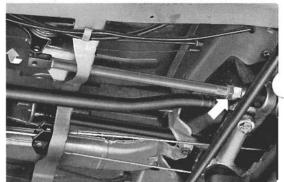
Correct pushrod length. Dimension a must be 106 mm (4.173 in.).
